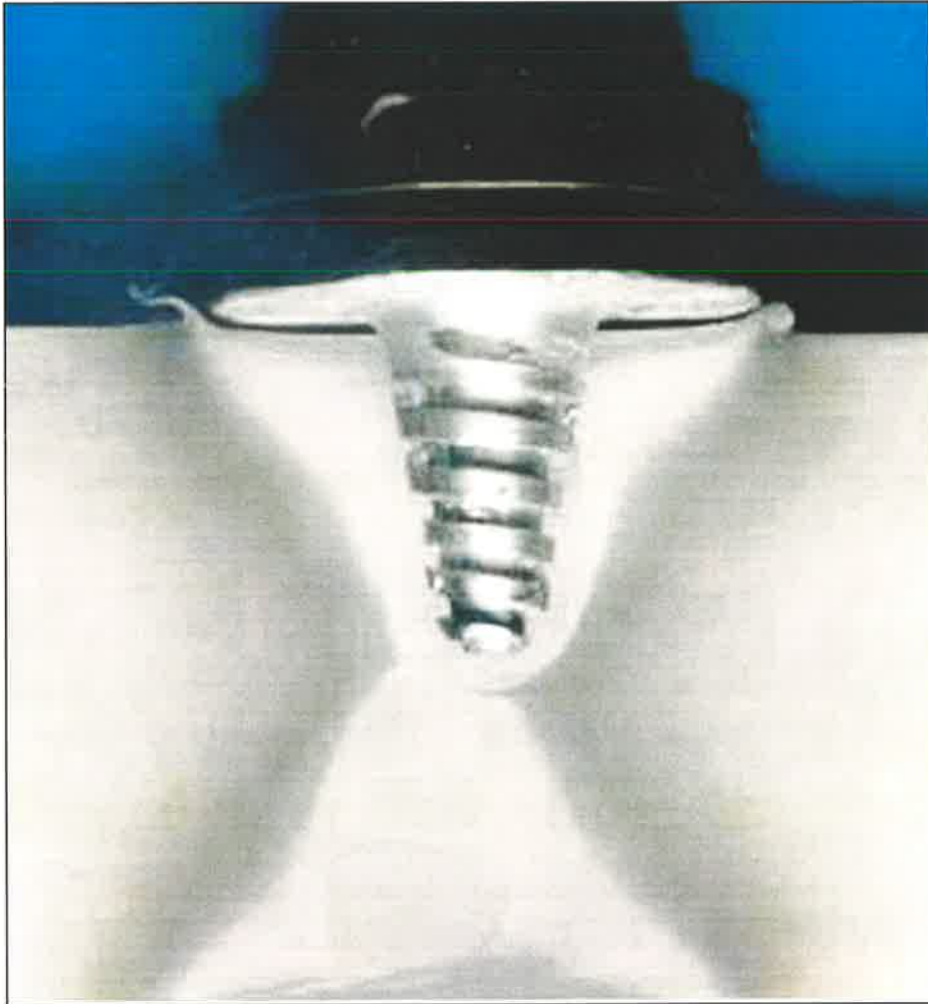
A photo of a Whorl pin developed by TWI and superimposed onto the a cross section of a friction stir weld produced using the same tool [110]
